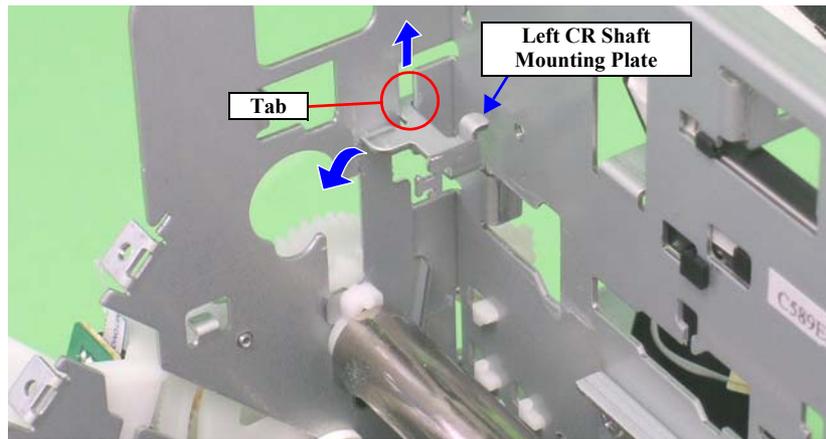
Rotating the Left CR Shaft Mounting Plate
